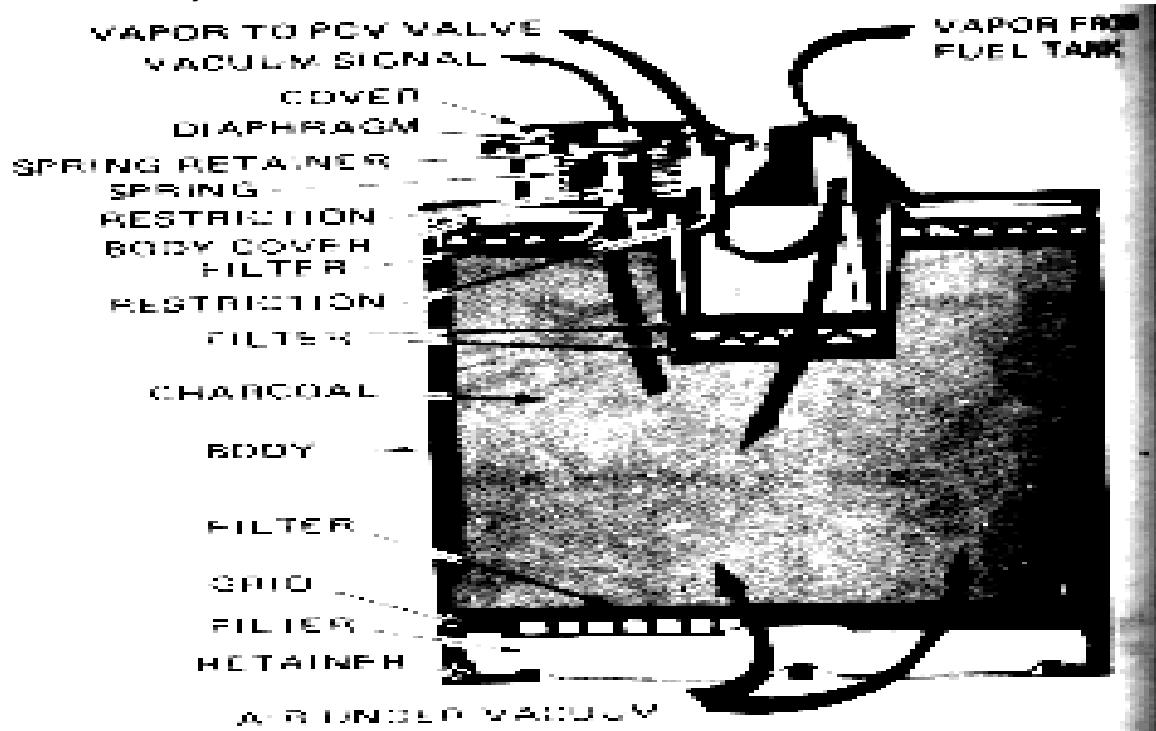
Sectional View of Charcoal canister for a six Cylinder engine Vapor Recovery System.
